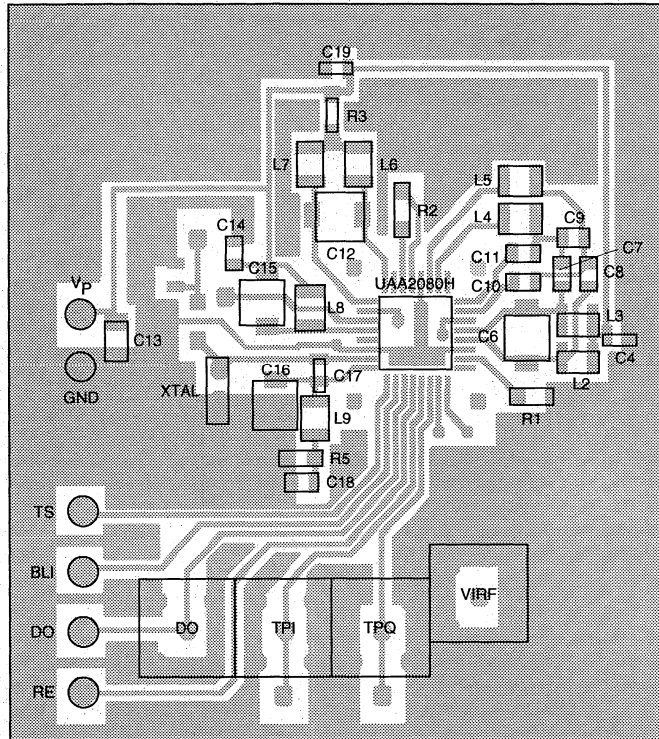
PCB bottom view for TQFP32; test circuit Figs 1 and 3.
